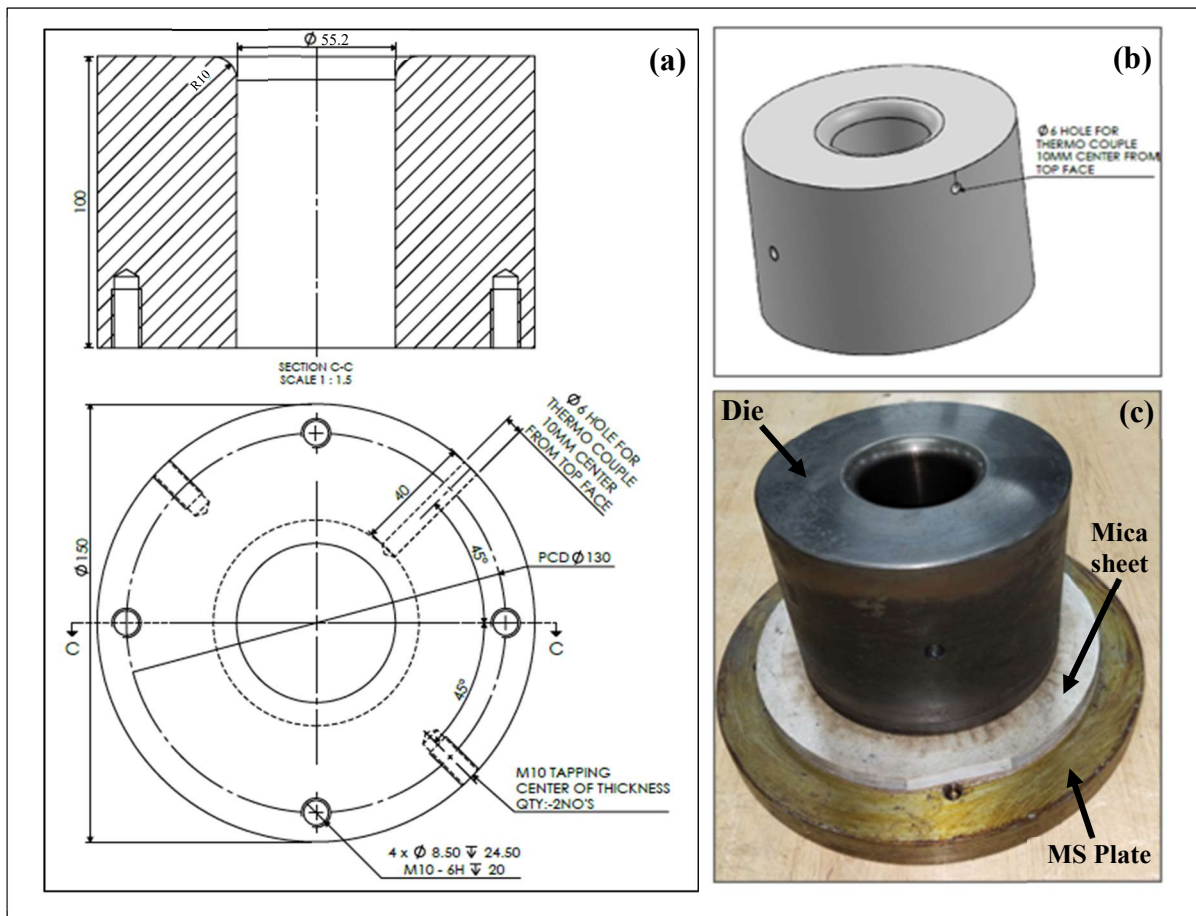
(a) Engineering drawing, (b) solid model, and (c) fabricated die for deep drawing. The bolts are used to fix the die, mica sheet and MS plate together which will be placed on the hydraulic press bed as shown in Fig. 5.13 (c). A 6 mm diameter hole is drilled at a distance of 12 mm from top surface, as shown in Fig. 5.13 (b), to accommodate the thermocouple, for temperature measurement of die, which will penetrate up to a radial depth of 40 mm. A 50 mm diameter cylindrical flat nose punch is used to perform the deep drawing operation. Fig. 5.14 illustrates the assembly of the die, blank holder and punch with heating arrangement on the hydraulic press.
